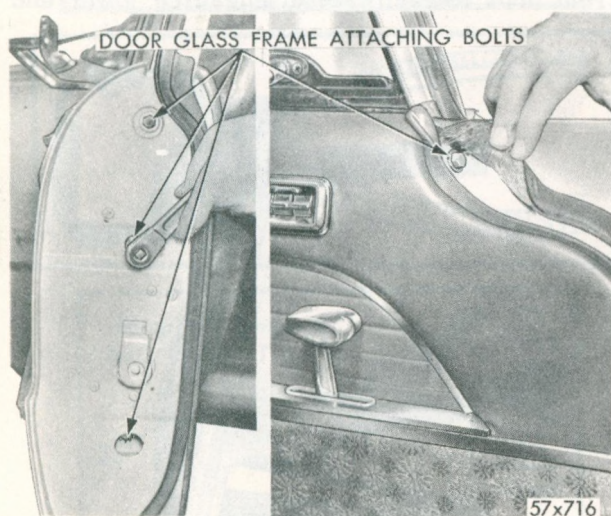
Removing and Installing Adjusting Frame and Glass Assembly
